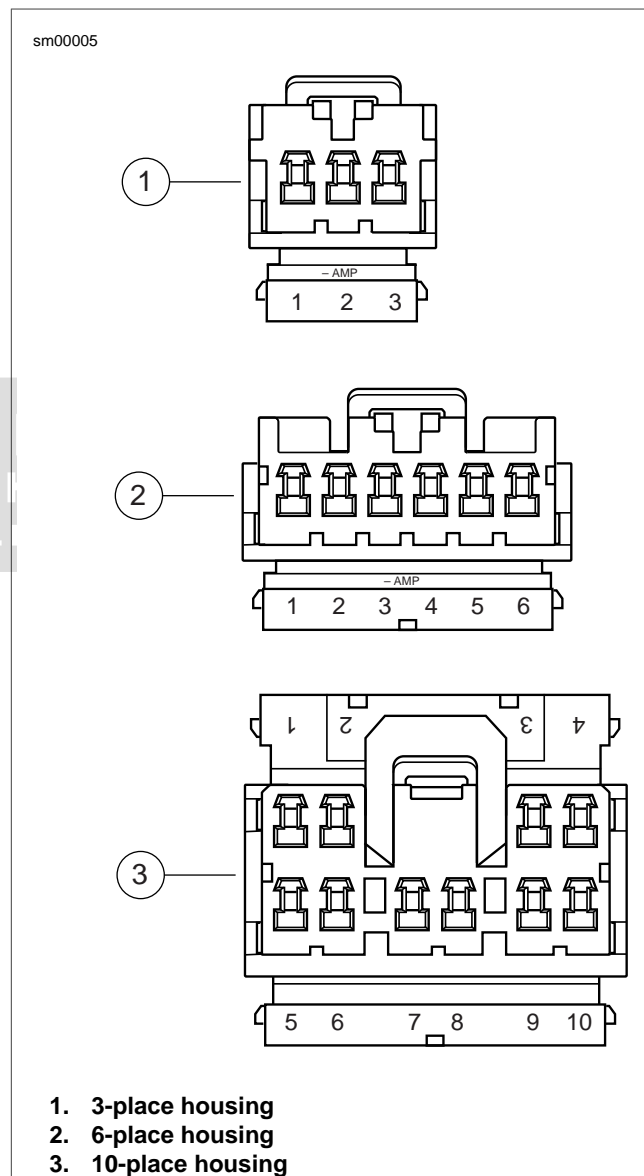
AMP Multilock Connector: Cavity Numbers on Secondary Locks (Socket Housings Shown)
